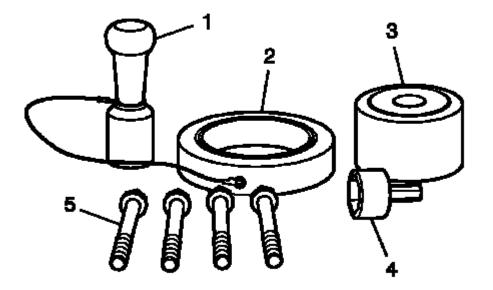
Cylinder Liner Trimming Tools View (1 Of 2) Courtesy of GENERAL MOTORS CORP.
